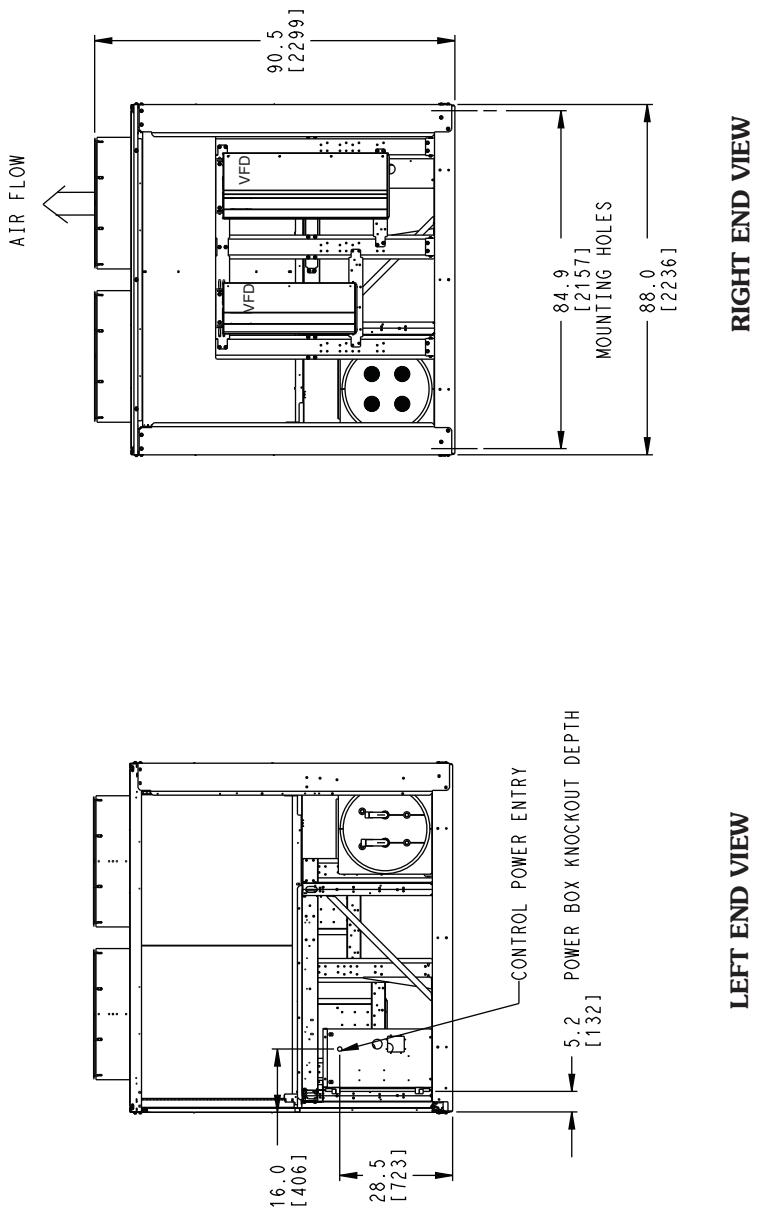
30XA262,282 Air-Cooled Liquid Chiller Dimensions (DX Cooler) (cont)
